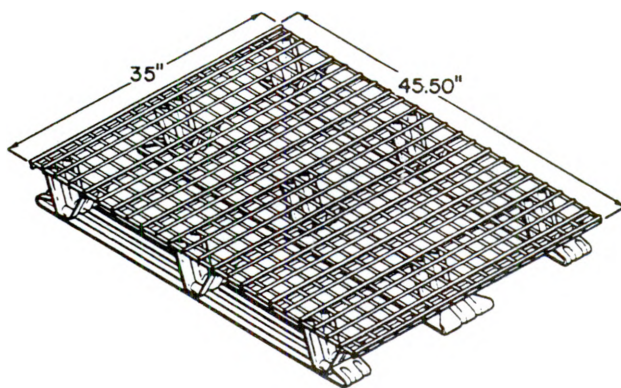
Mk 12 Mod 1 material handling pallet.
